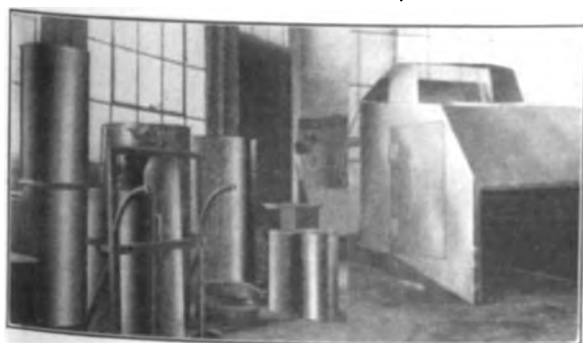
WELDED SHEET METAL CYLINDERS
